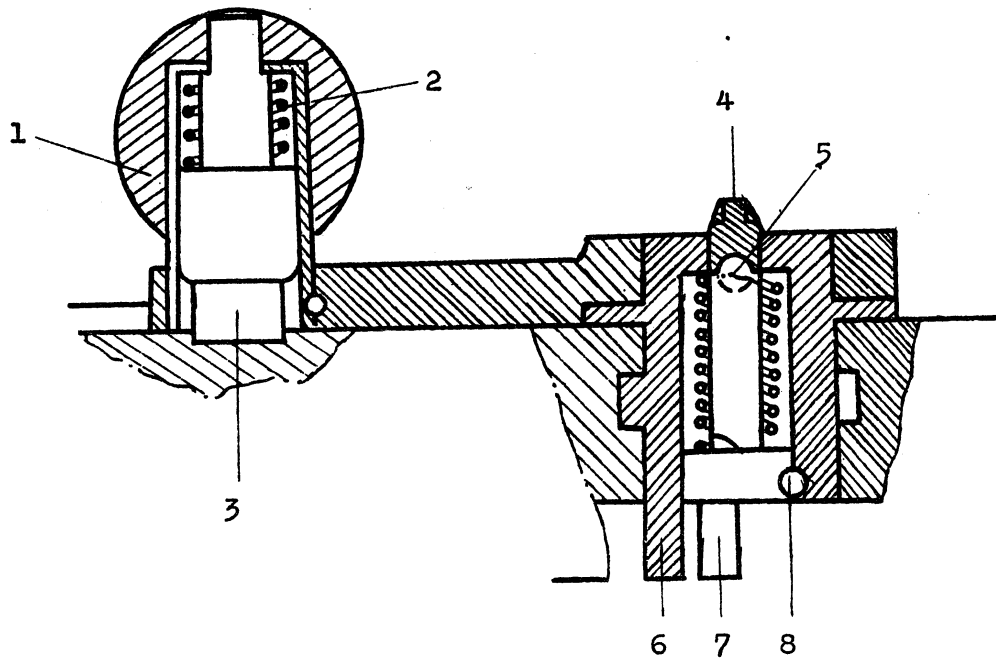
RECOCKING HANDLE ASSEMBLY
